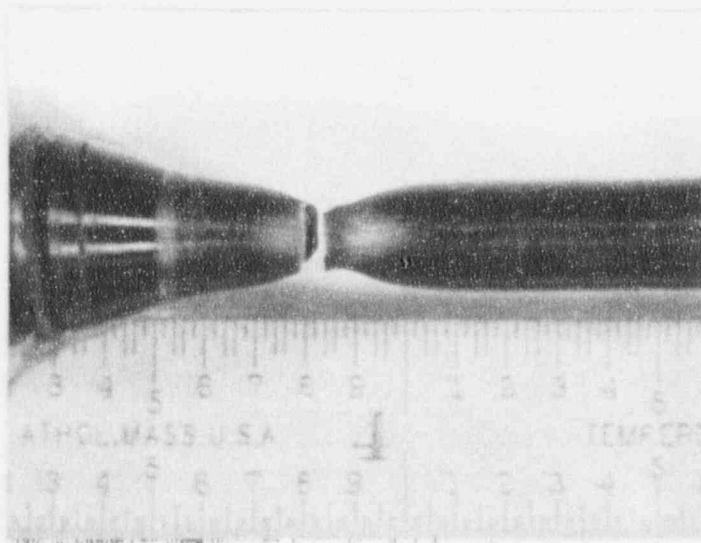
Fracture Location, Necking Behavior and Fracture Appearance
